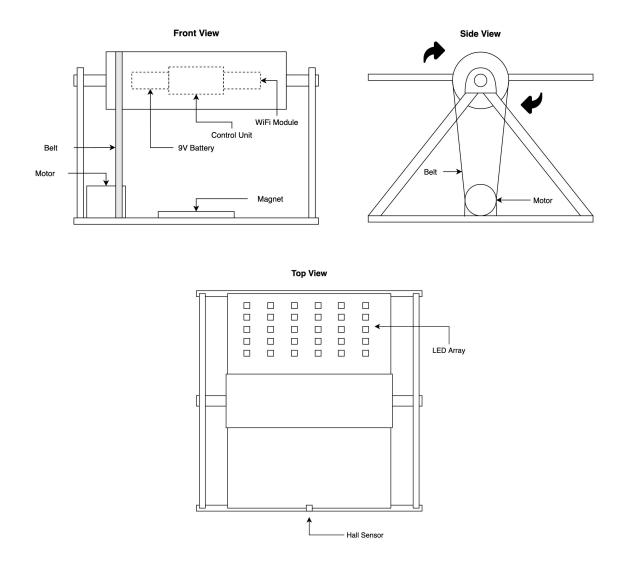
This figure shows what the overall product will look like in terms of a final solution. The motor will be connected to the 3-D printed base and use a belt system to rotate the propeller. The propeller will be attached to the main unit via ball bearings, for the purpose of rotating with as little friction as possible. All the electronic components besides the motor will be held inside the propellor. None of the electronic components are visible besides the LED array and the hall sensor. The LED array is displayed on one side of the propellor, while the hall sensor is on the other side, keeping track of the rotations of the motor. The two system design makes it very easy for the propeller to move independently from the entire system.
